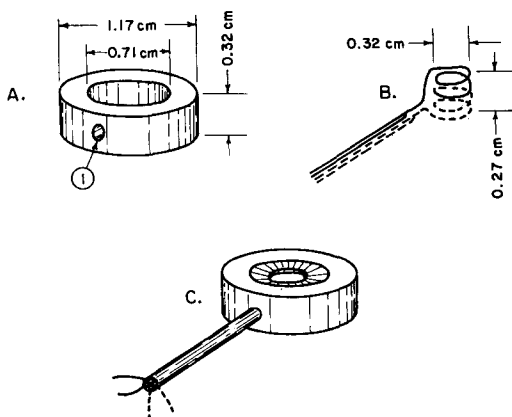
Resistance heater assembly. (A) The pyrophyllite support; 1 is a hole for 1.6-mm-diam. four-wire ceramic tubing. (B) The winding is made of 0.033-mm-diam. wire, four turns at 19 turns per centimeter. Solid line is Pt; dashed line is Pt10Rh. (C) The assembled heater; Sauereisen cement holds the winding in place.
